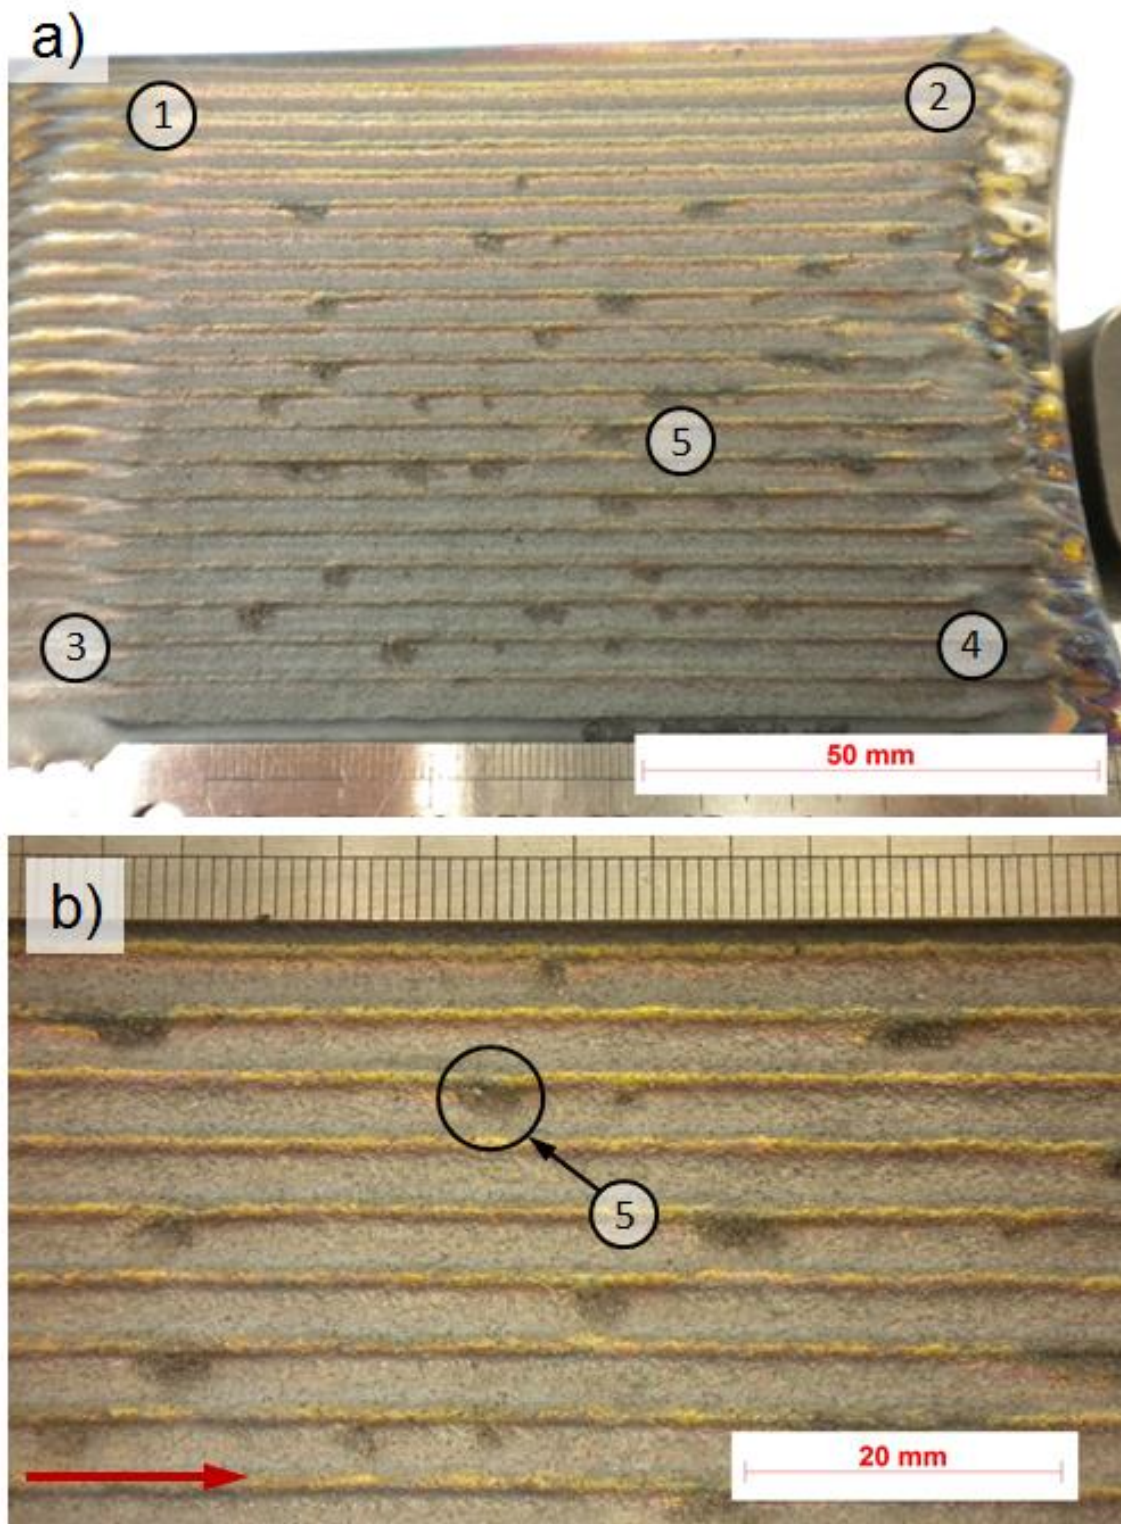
Cladding trial in overlap; a) PFR = 15 g/min; b) magnified image of a); 1: Beginning of first weld; 2: finish of first weld; 3: beginning of last weld; 4: finish of last weld; red arrow: welding direction; yellow arrows: check cracks
